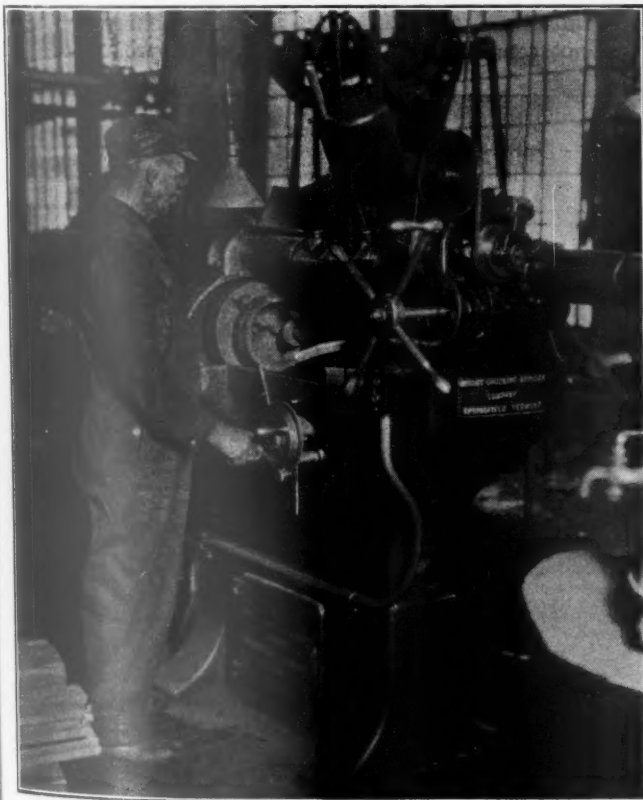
Grinding a 2½-in. by 3-in. Motion Work Bushing on a Bryant Chucking Machine
